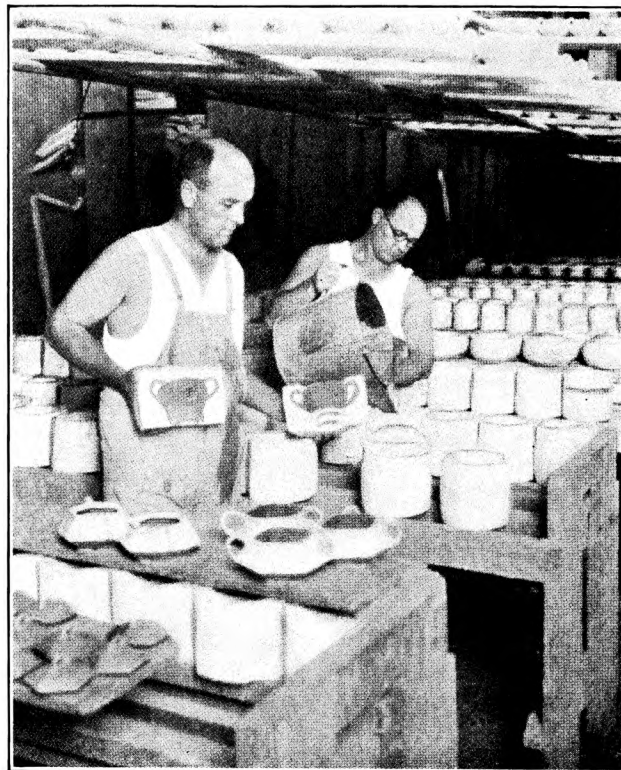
CASTER, AT RIGHT, POURING SLIP (LIQUID CLAY) INTO MOLDS IN WHICH ARTICLES OF WARE THAT CAN NOT BE MADE BY JIGGERMEN ARE SHAPED; AT LEFT, CASTER TAKING ARTICLE FROM MOLD
